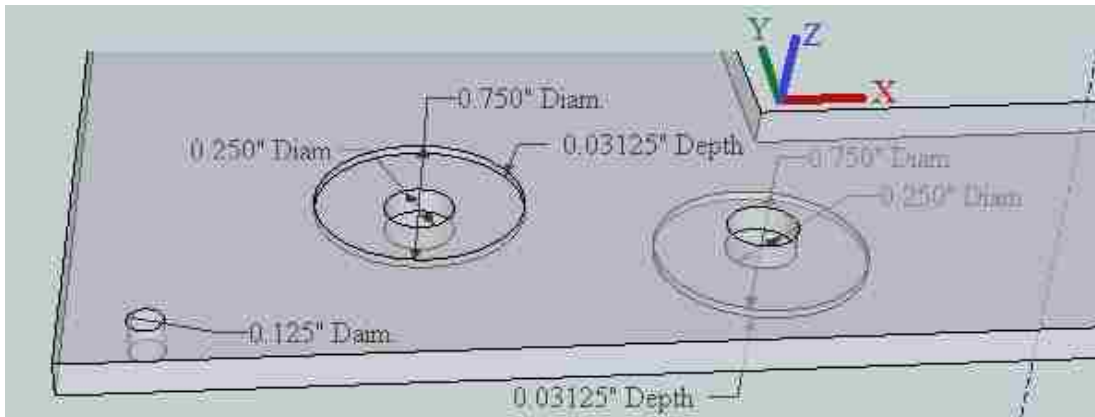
Orthogonal view of the 10x10 cm² upper trimmer aluminum plate illustrating hole dimensions.
